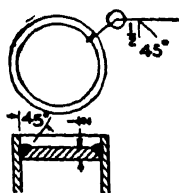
Bevel Butt Weld for Pressure Vessel Head.
